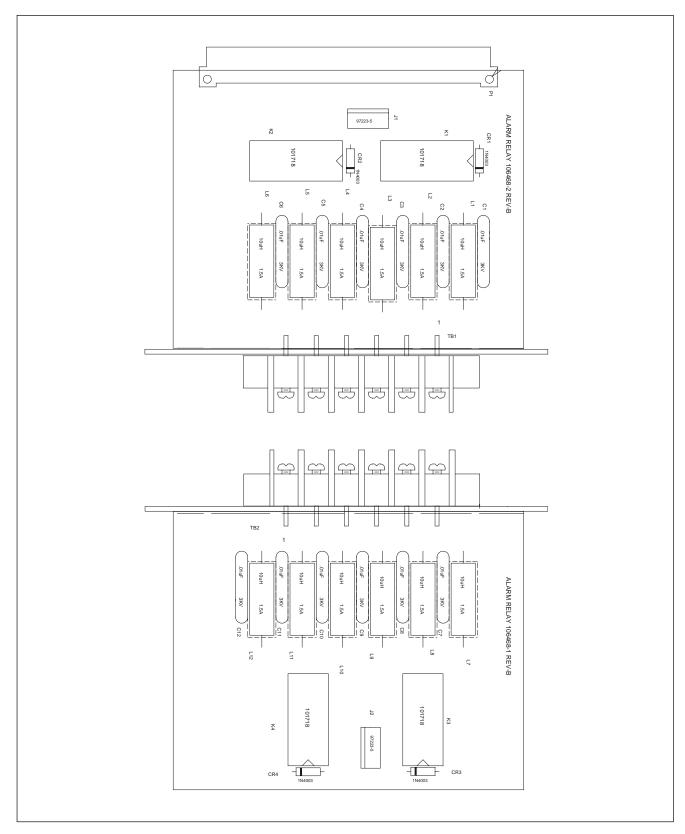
Component locator drawing, Alarm Relay I/O module
